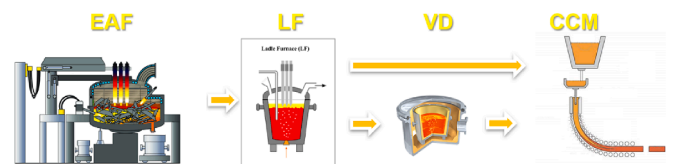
Overview of an entire metal casting process with all the phases of Electric Arc Furnace (EAF), Ladle Furnace (LF), Vacuum Degassing (VD, Optional) and Continuous Casting Machine (CCM).
